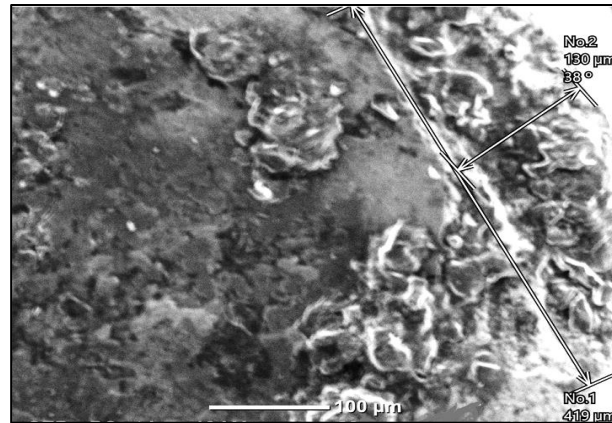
Tool wear of the 1st cutting tool at 150X magnification (50 m/min cutting speed, 0.525 mm/rev feed, and 1.00 mm depth of cut)
